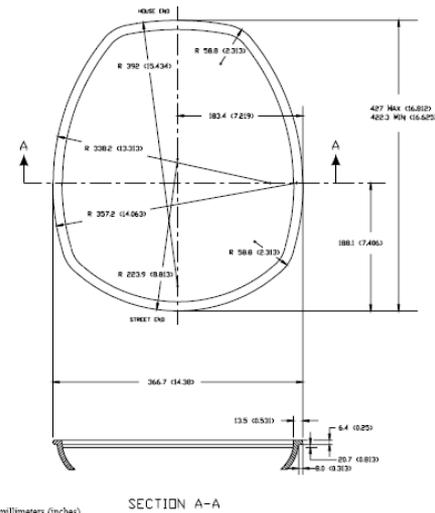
A – Flange dimensions for refractors for medium horizontal-burning HID luminaires
